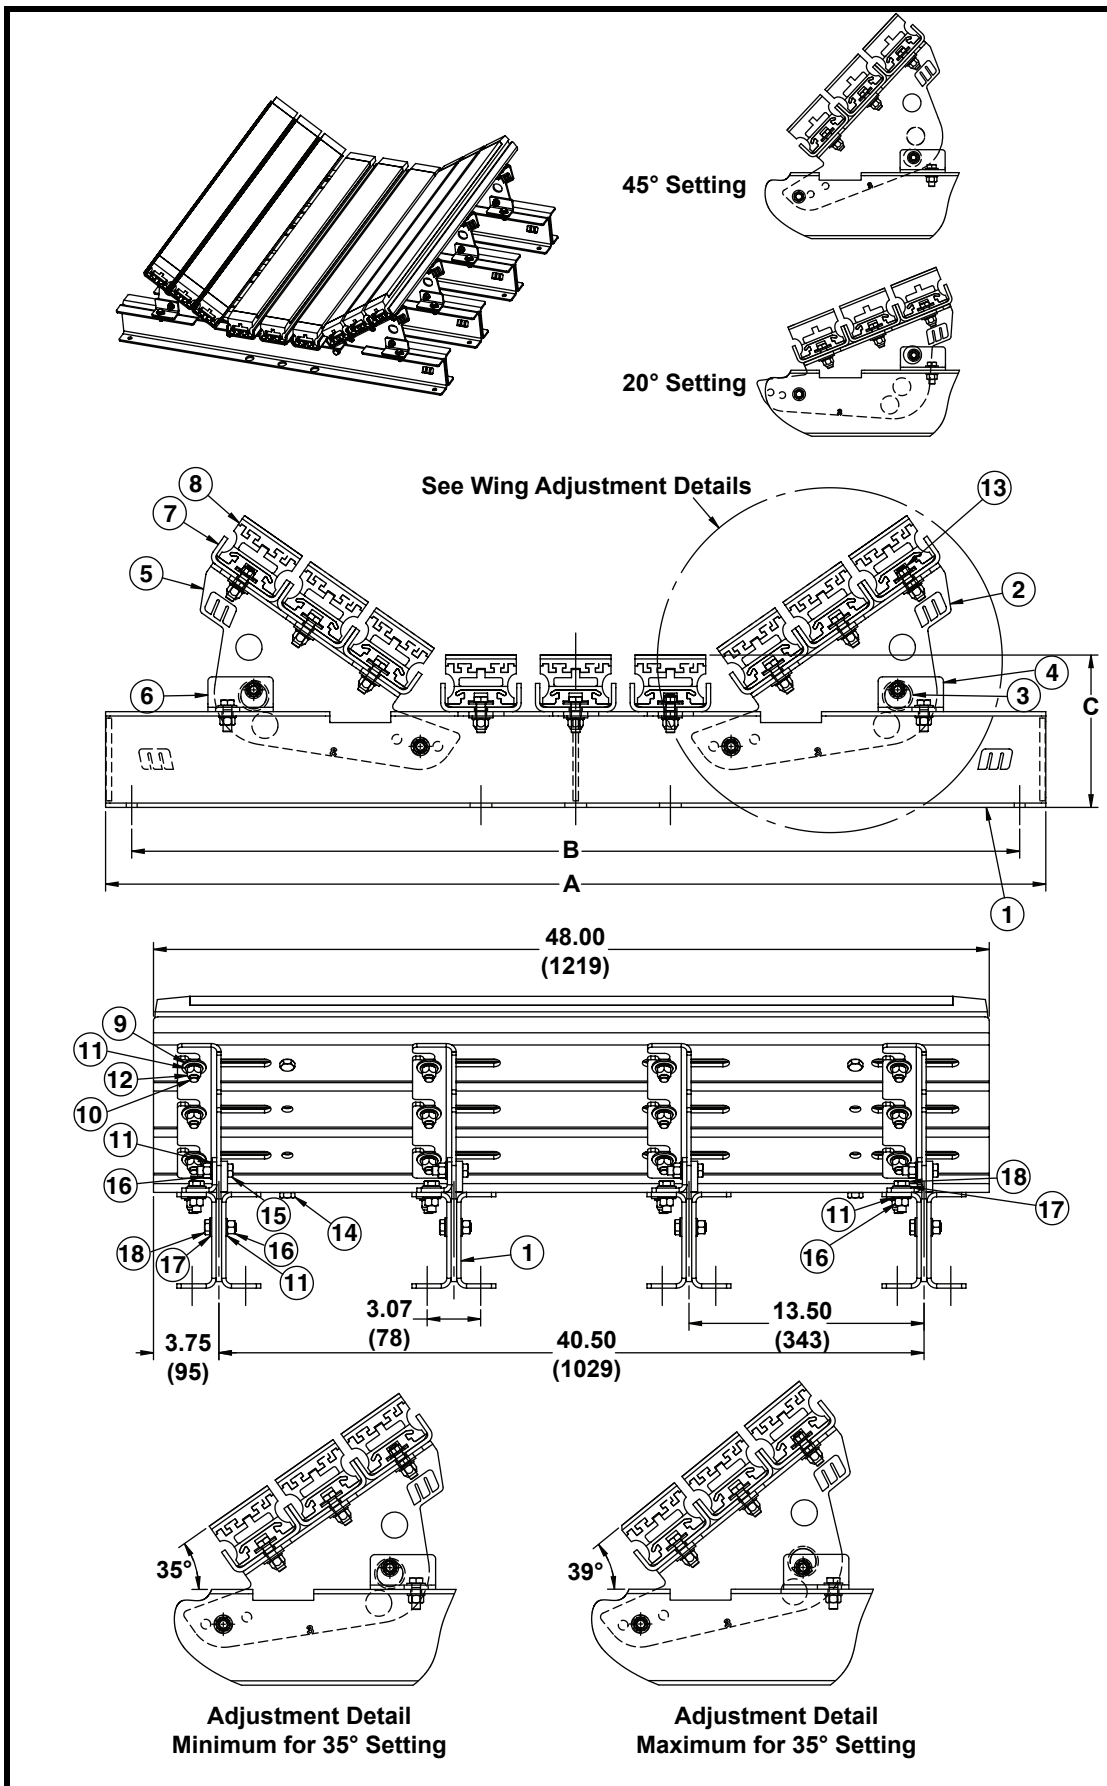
Martin® Impact Cradle MD Assembly, P/N 36318-XXX (Sheet 1 of 2)
